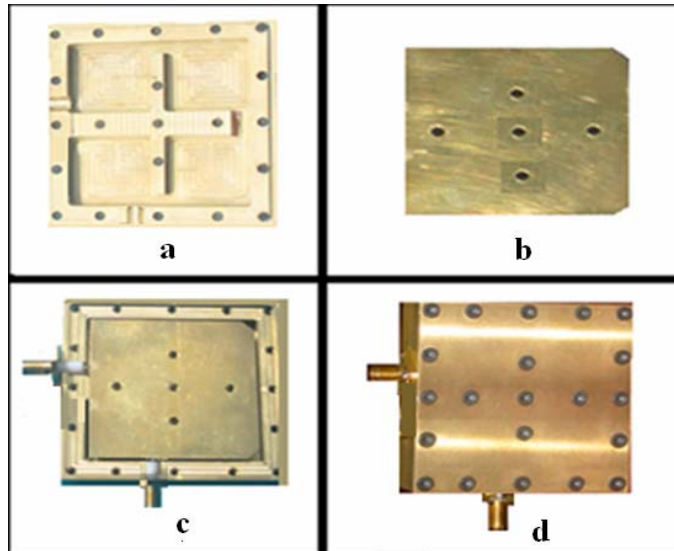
Fabricated 4-pole folded waveguide resonator filter before assembly (a, b and c) and after assembly (d).
